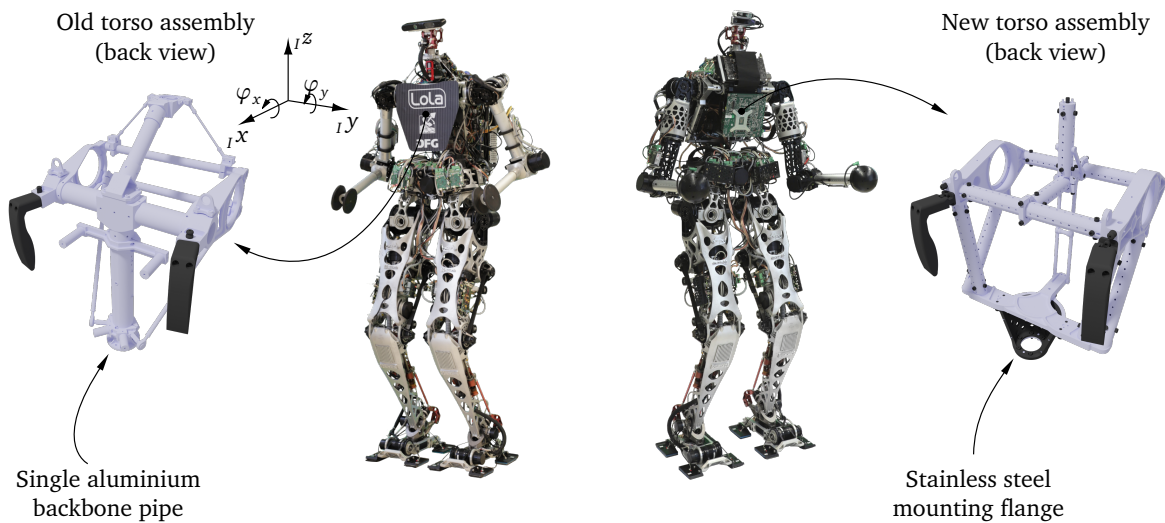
Old (left) and new (right) mechanical design of LOLA with the old and new torso assembly. Adapted from our paper [240].
